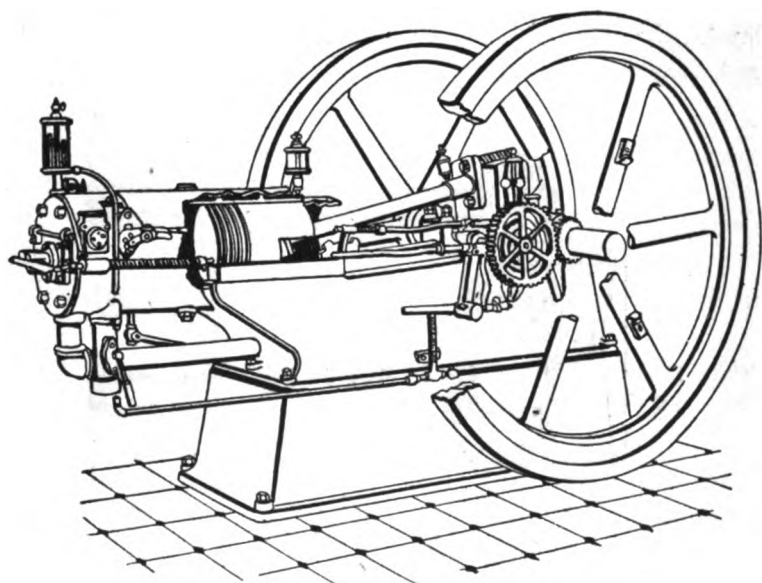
WAYNE GAS AND GASOLINE ENGINE.
